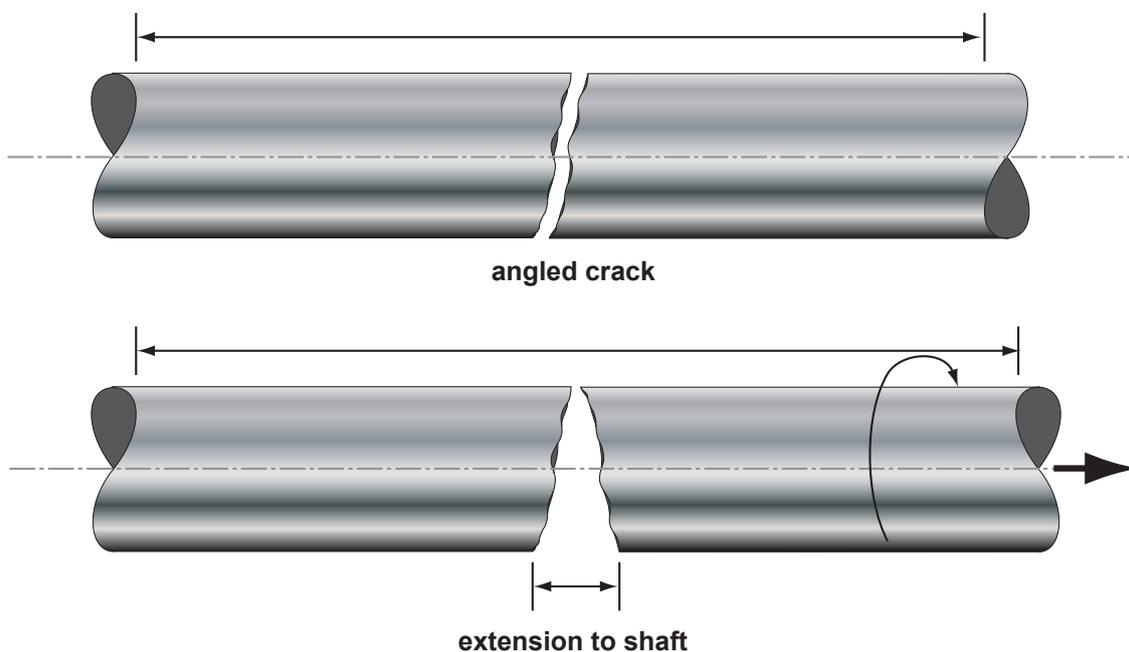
Diagram showing how fracture lengthened crankshaft
